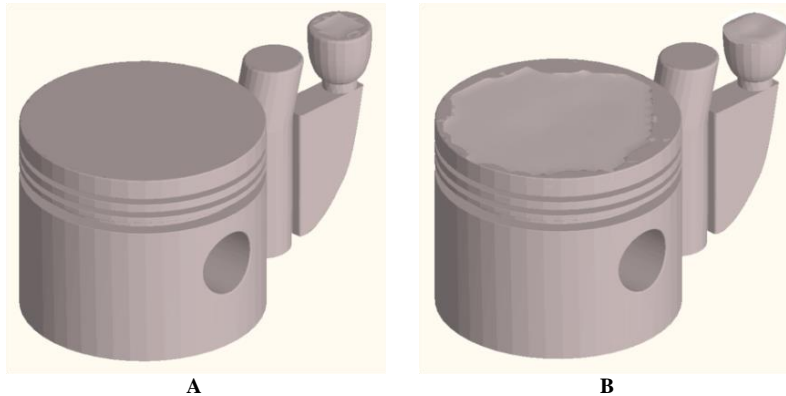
The cast iron piston (A) and the aluminium piston (B) after metal mold casting (the feeding point is provided).
